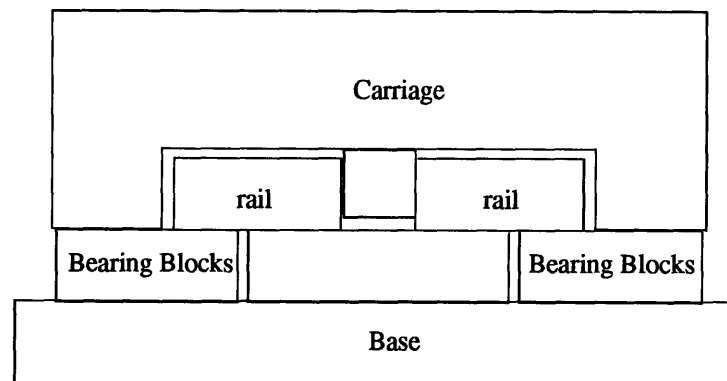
Schematic of the hydrostatic bearing design using bearing blocks..
